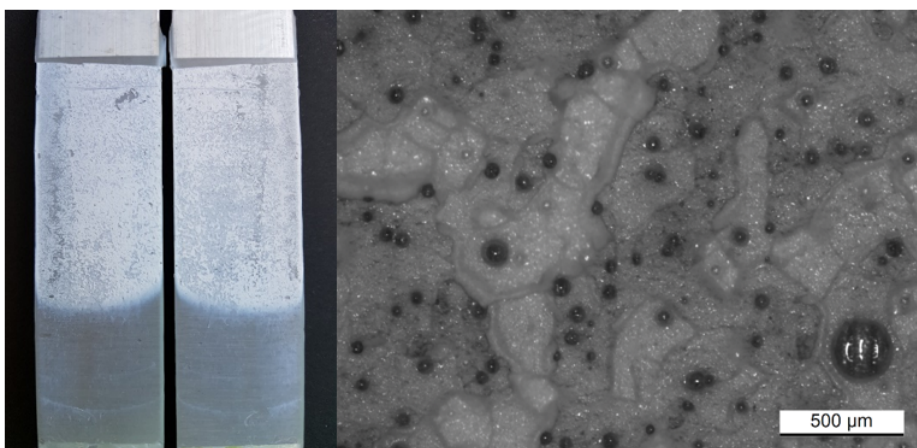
Fracture surface of a T-joint ablated with $ED=1.14 \text{ J/mm}^2$ and $H=50 \mu\text{m}$ [154]
